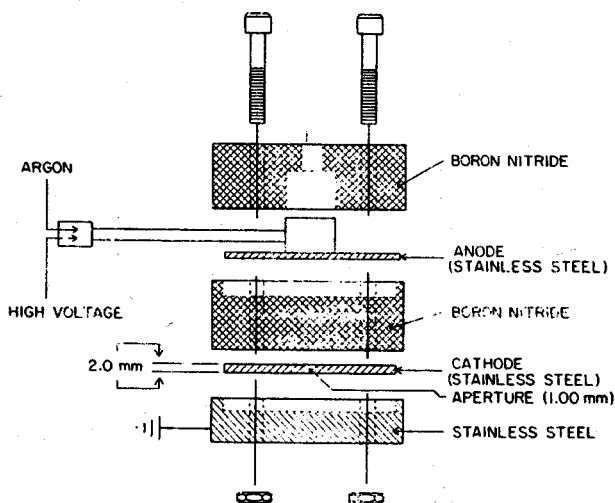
Schematic assembly drawing indicating the components of the glow discharge ion source.
